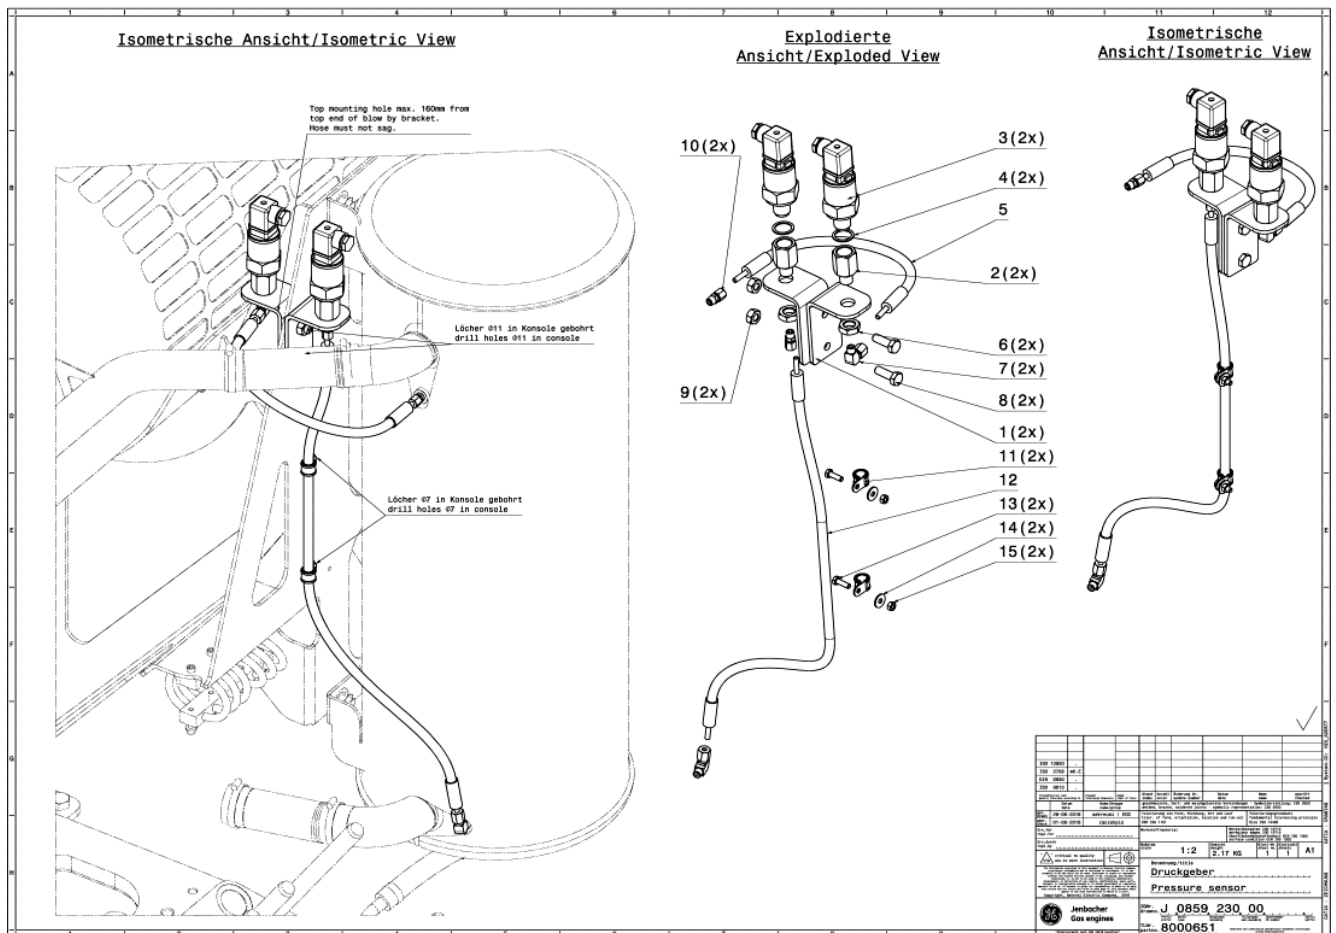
Drawing - Blow-by filter differential pressure sensor - TL8000651
